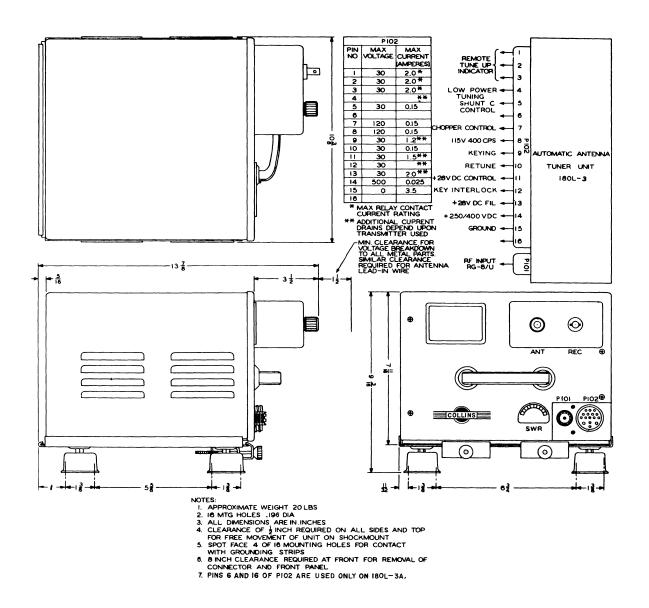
Antenna Coupler 180L-3, 180L-3A, Outline and Mounting Dimensions
